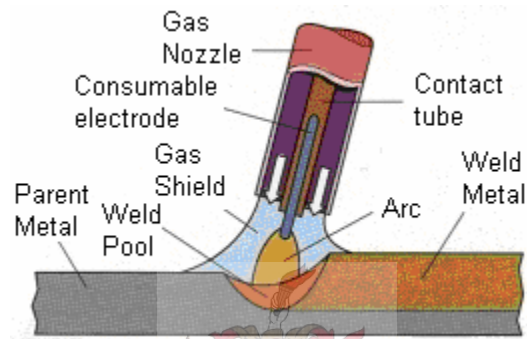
Gas metal arc welding (GMAW).
